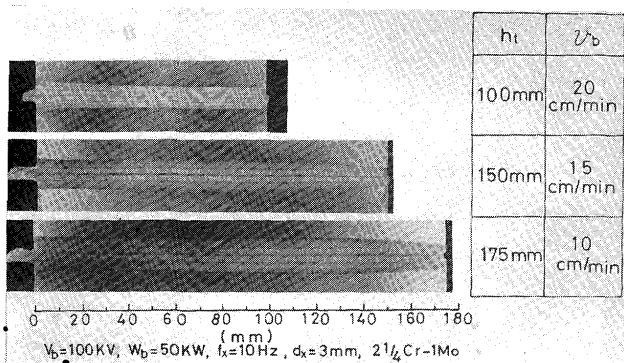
Fully penetrated bead section of horizontal position welding at various plate thicknesses.
